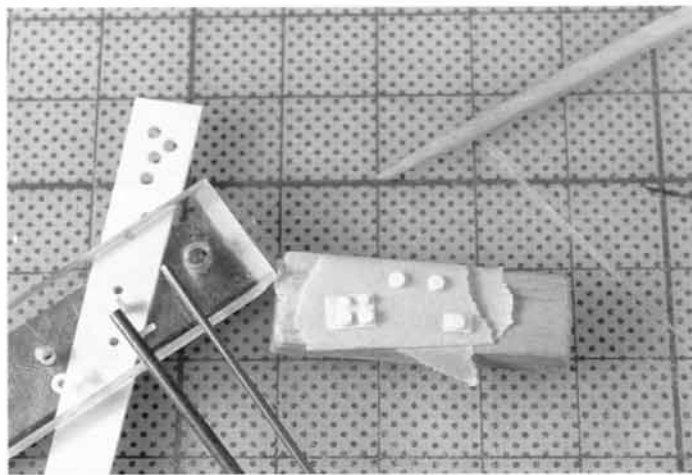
Dials can easily be made using Waldron's punch tool. The edges of these small disks will have small burrs; to get the disks to sit flat, run them across a stationary piece of 600-grit sandpaper with your finger.
